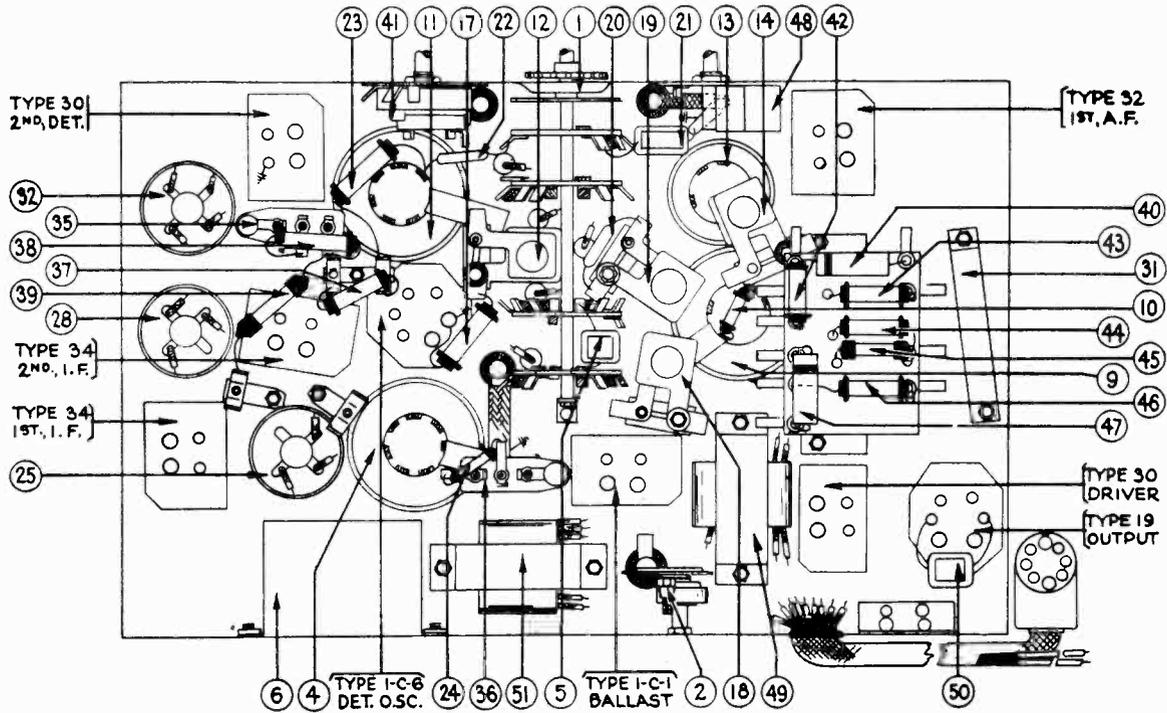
Bottom View of Chassis, Showing Parts, and Position of Compensating Condensers Reached from Below Chassis
